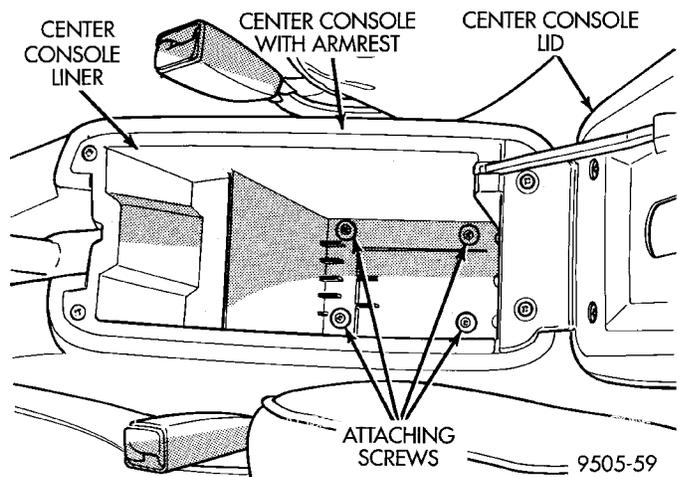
Center Console With Arm Rest Rear Attaching Screws
